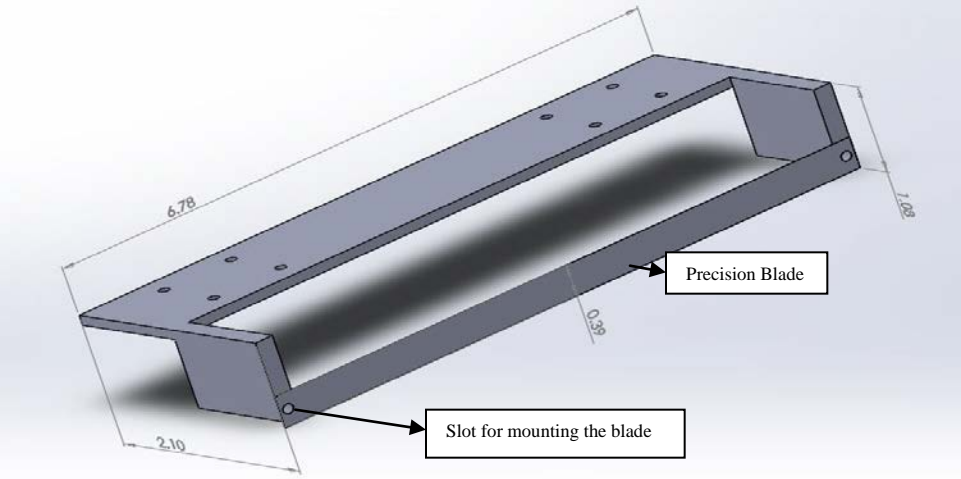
CAD model of the blade carriage and the blade- the holes are for mounting it onto the top plate
